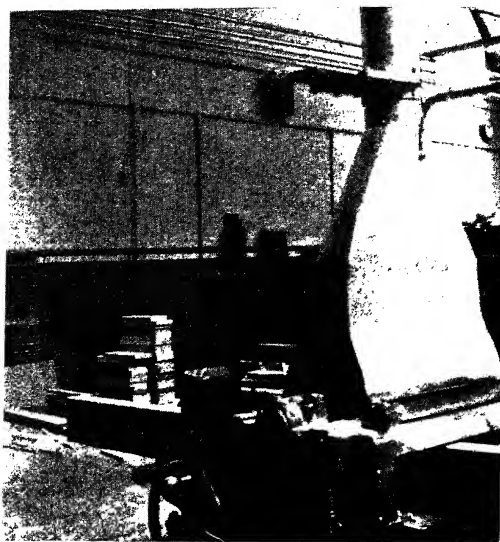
SPAR PASSING THROUGH THICKENING MACHINE.
